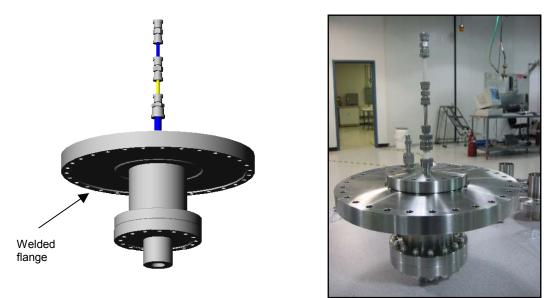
a) Drawing and b) photograph of vacuum chamber adapter and BLPT.
